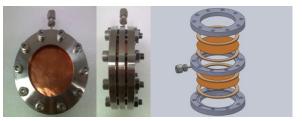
Photographs and an assembly drawing of the proposed hydrogen permeation sensor made of modified CF flanges with hydrogen permeable membranes
